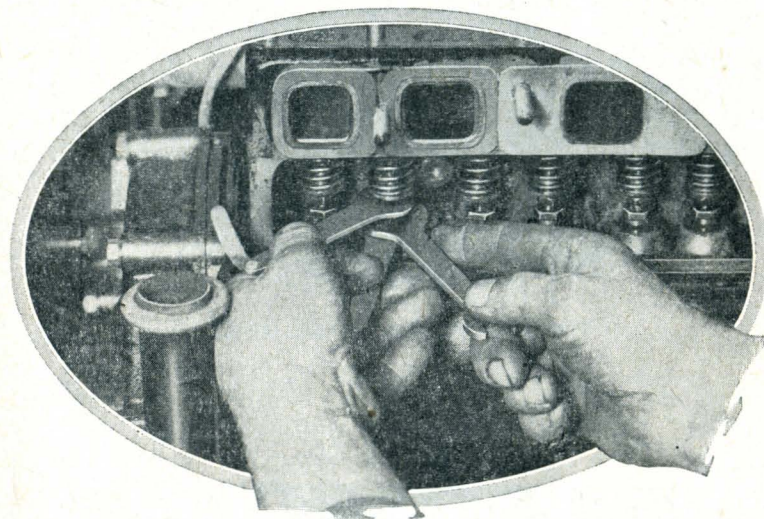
TIGHTENING UP THE TAPPETS AFTER ADJUSTMENT
